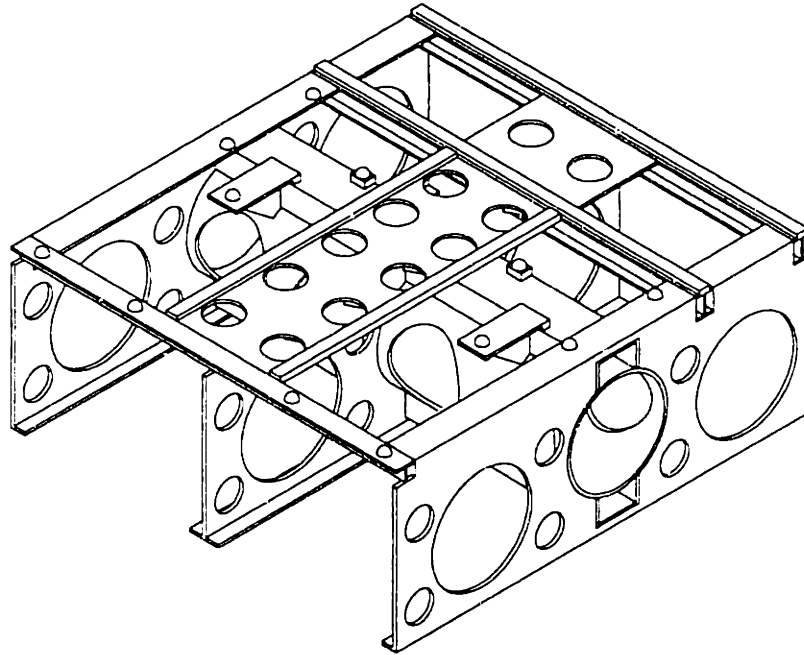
Modular machine substructure concept with central tube for bending and torsional stiffness.
